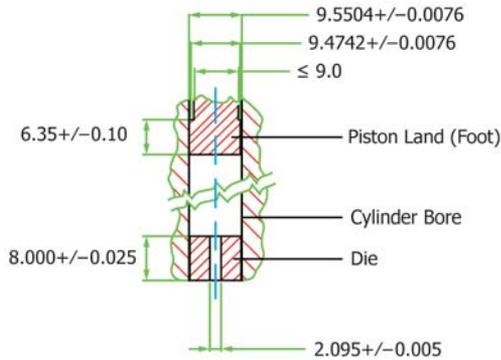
Dimensions of the cylinder bore, piston foot & standard die
